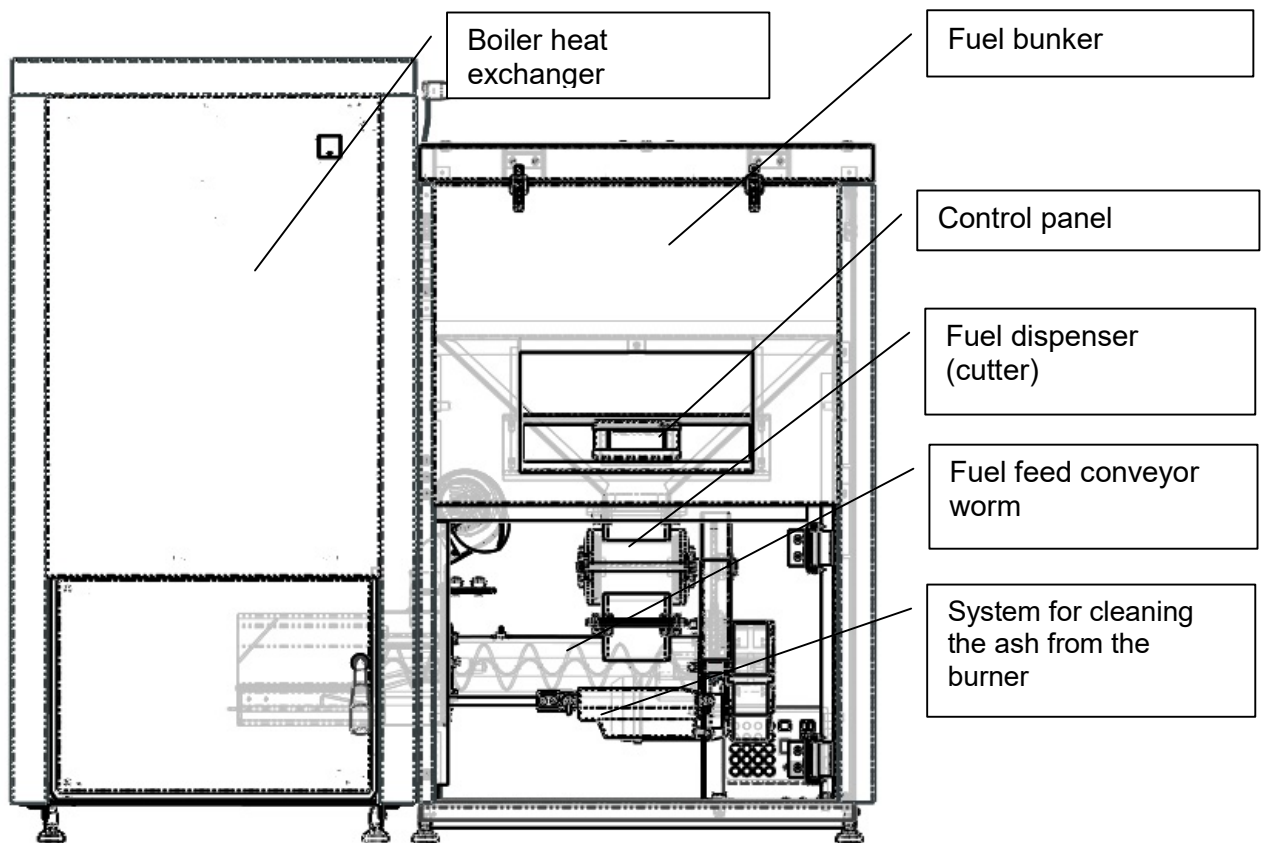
Sectional view of pellet boiler "Pelletherm 100 V.2 M03" - front view.
